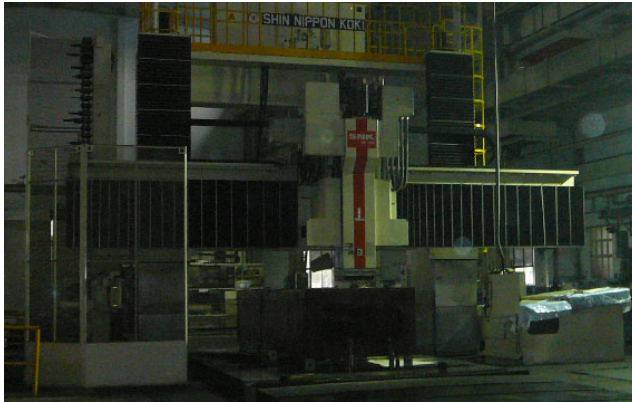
Picture of the large scale five-axis gantry type high speed machining tool
